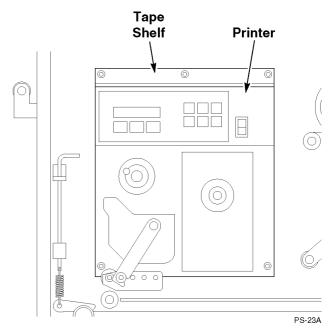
Print Engine (Left-Hand Printer Shown)
